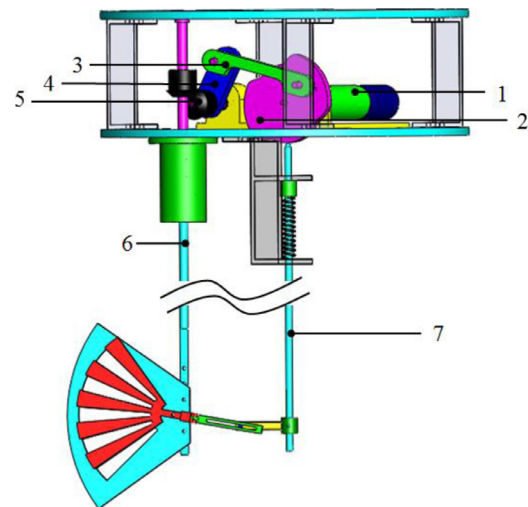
Sketch of the driving module. 1. motor, 2. crank-cam, 3. middle rod, 4. rocker, 5. bevel gear, 6. pitching rod, 7. slide rod.
